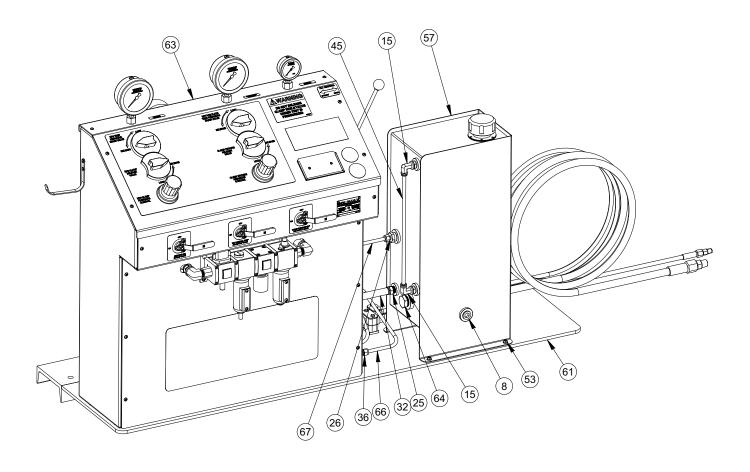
UFV-12-100T CONSOLE FRONT ASSEMBLY (P/N 88847)
